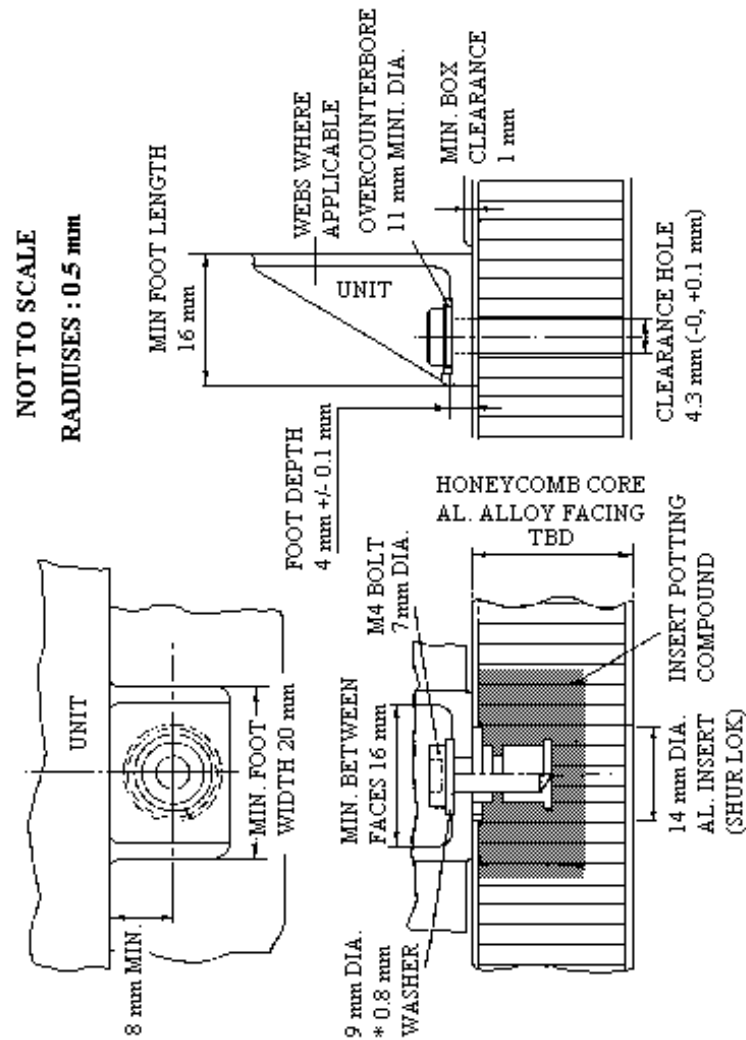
/2 : Typical Mounting lug (M4 Bolt)
